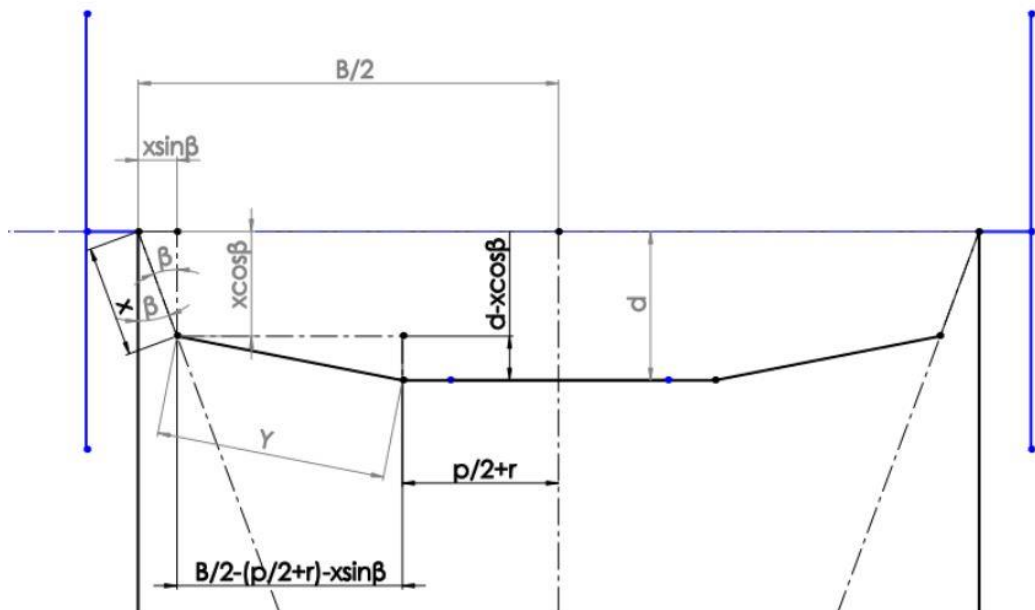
Rack-and-pinion geometry. Initial zero toe condition
